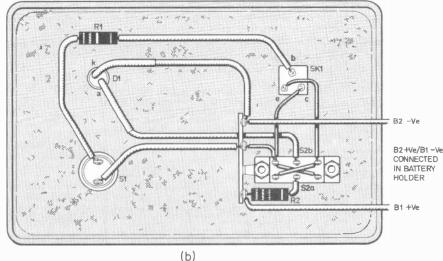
(b) Layout of components and interwiring for the I.e.d. version. The tag strip is mounted under one of the polarity switch fixing screws.
